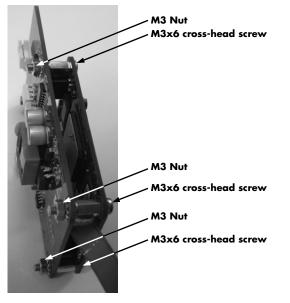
Remove three (3) M3 nuts, and three (3) M3x6 cross-head screws.
